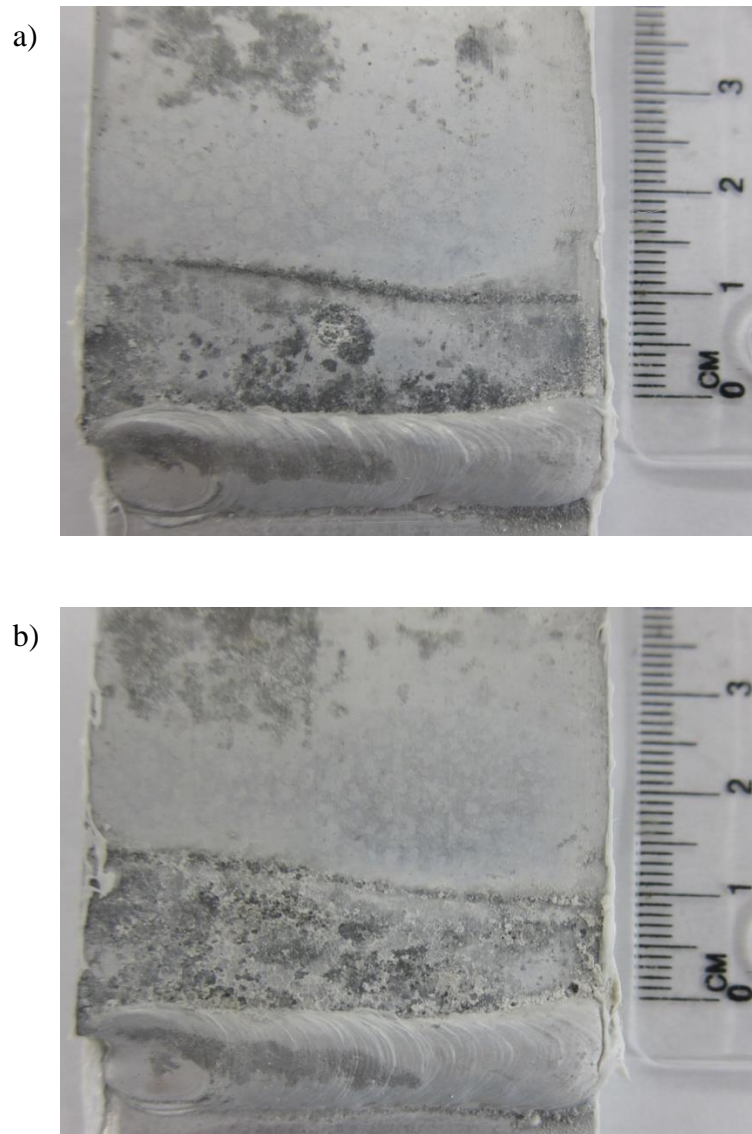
Close-up images of duplicate samples of lap-joint welded configuration C1 (ER5356/AA7108/L) in the as-welded T6 condition.
